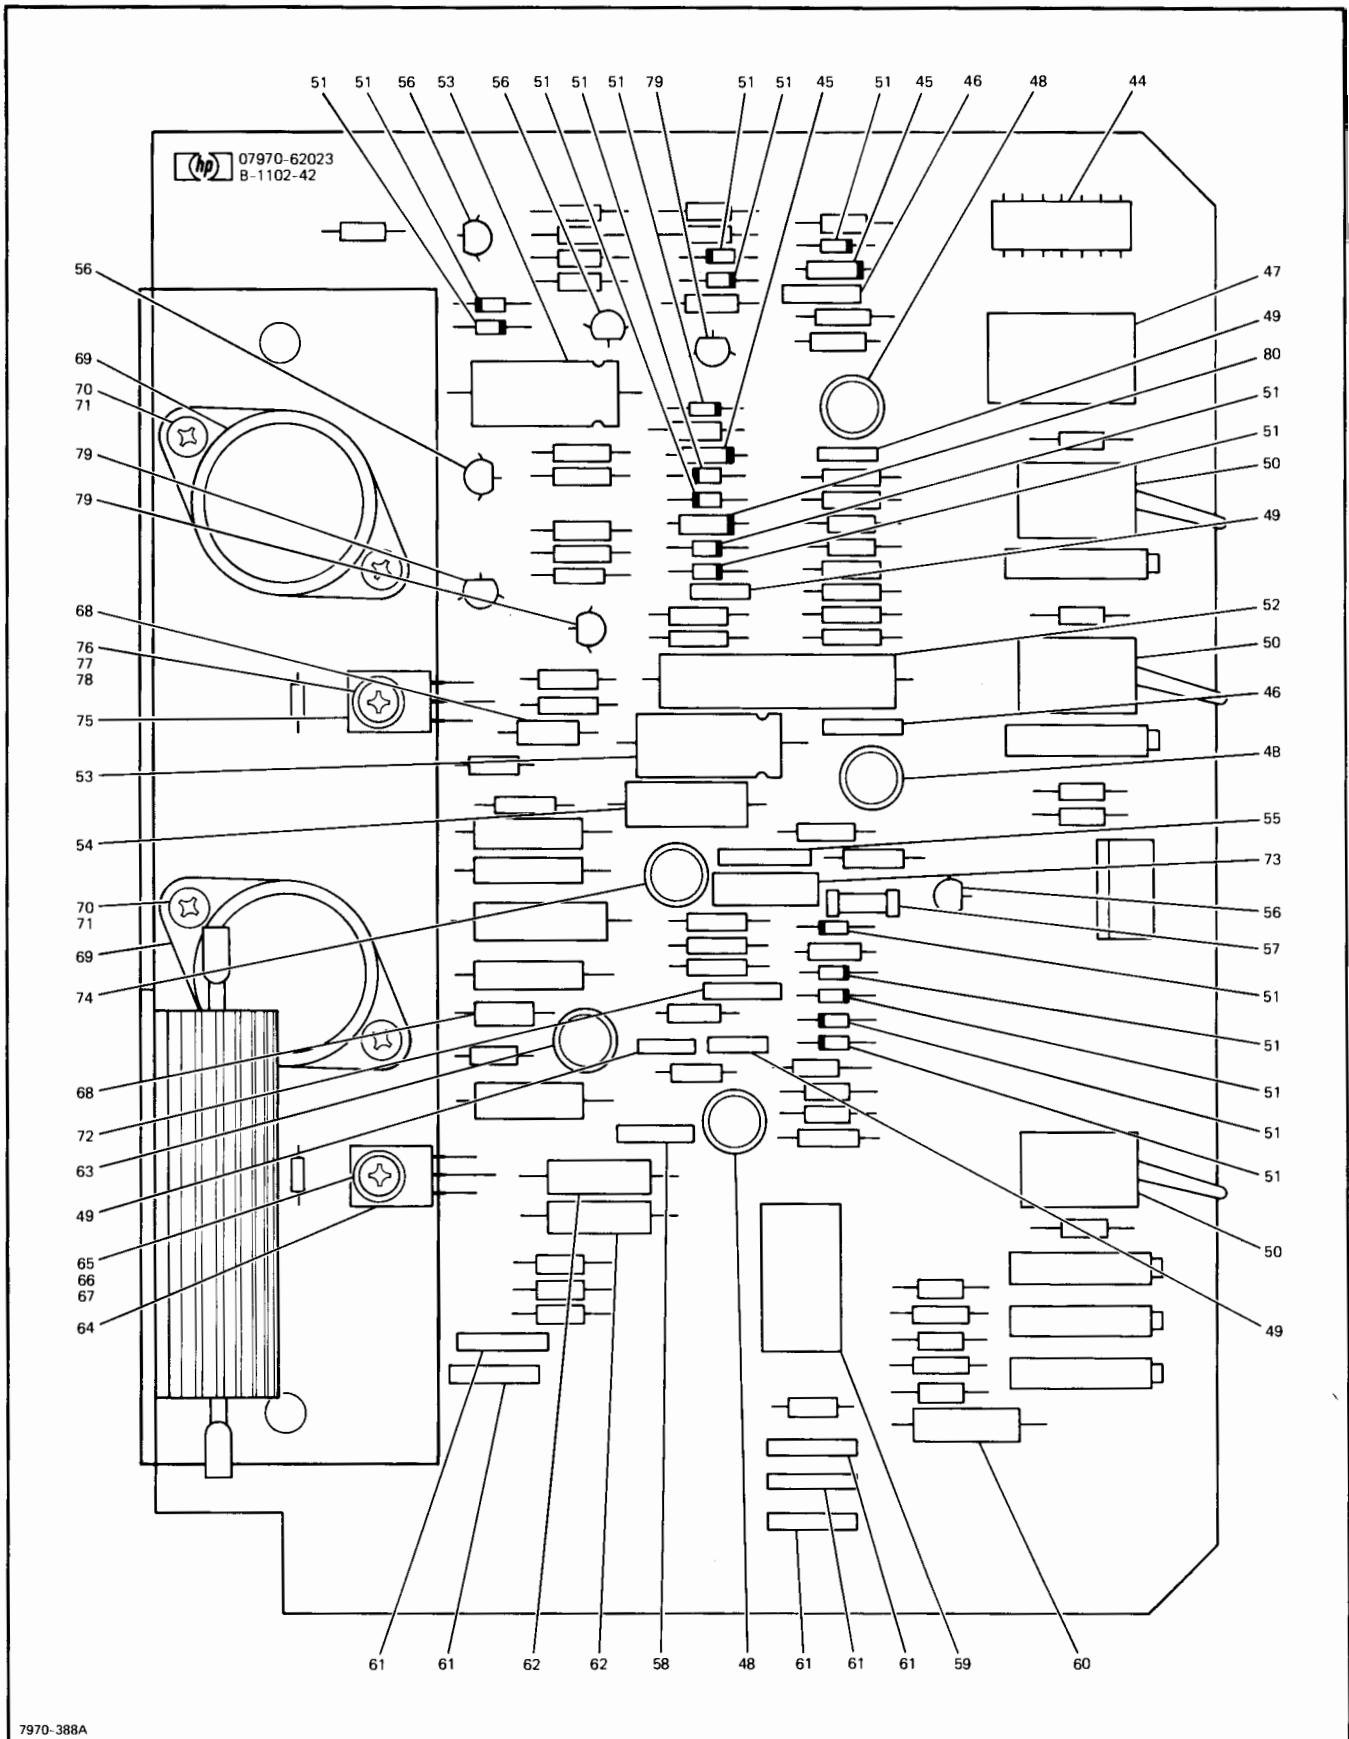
Capstan Servo PC Assembly A9 (Sheet 1 of 2)
